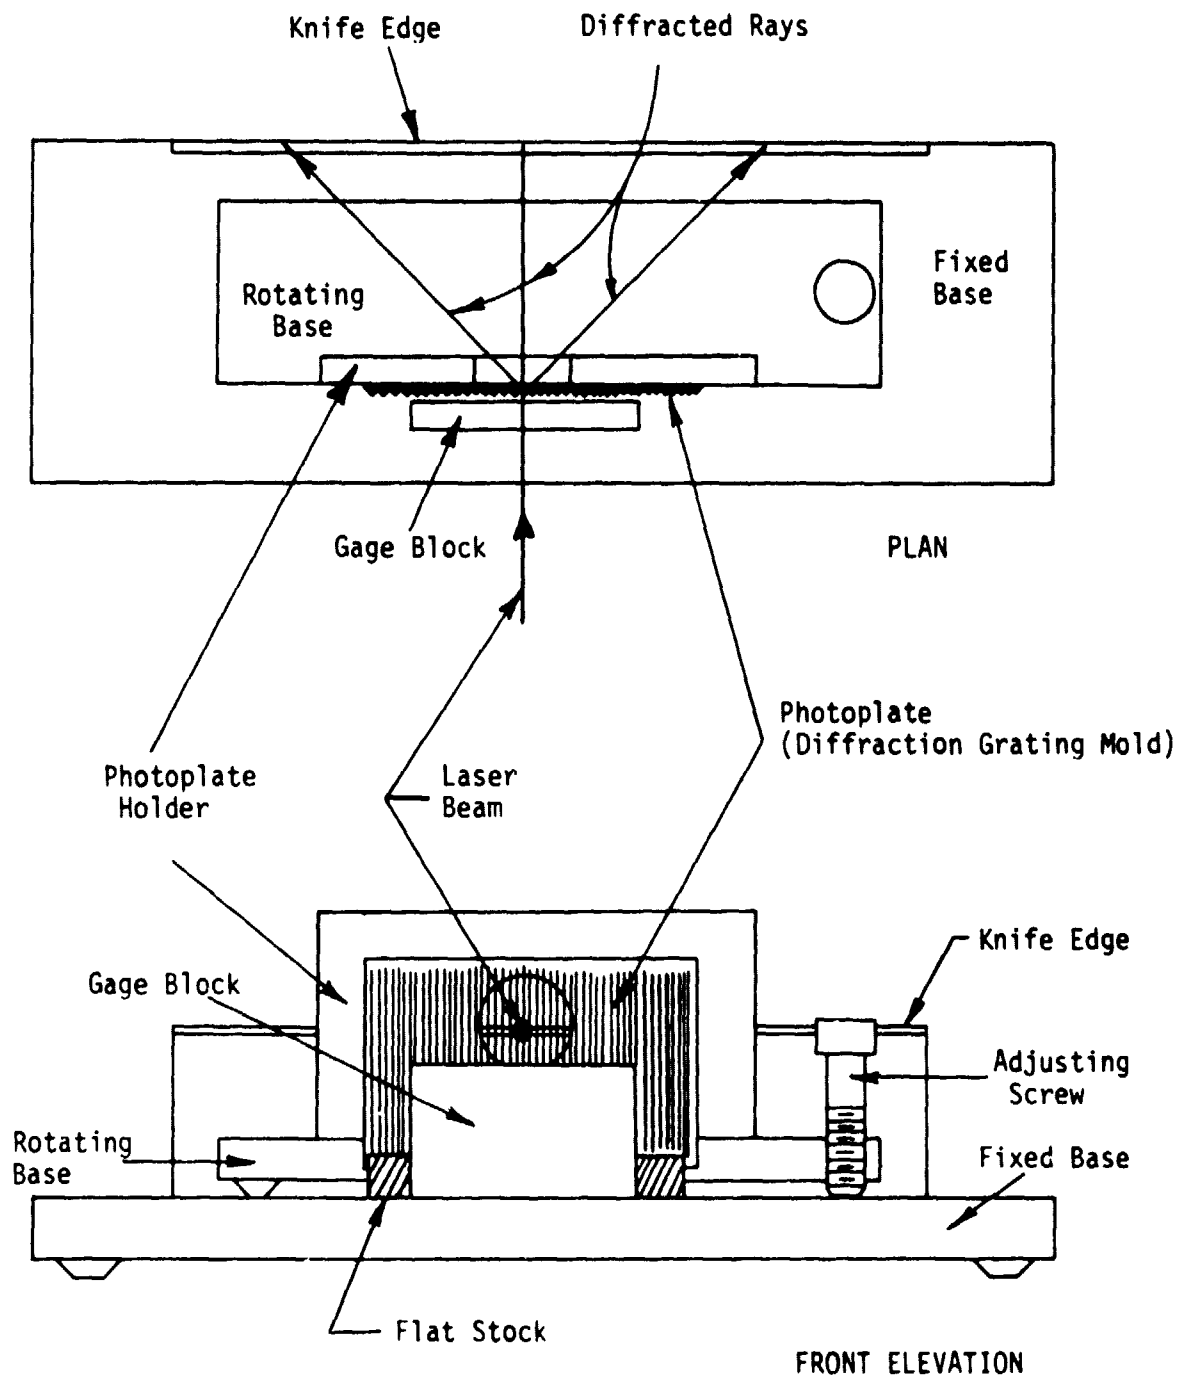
Fixture for Aligning Longitudinal Gage Line on Mold
